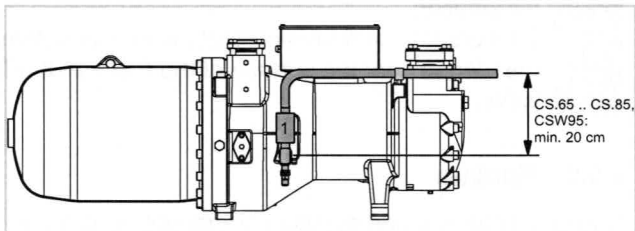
Pipe layout of the ECO suction gas line at the compressor
